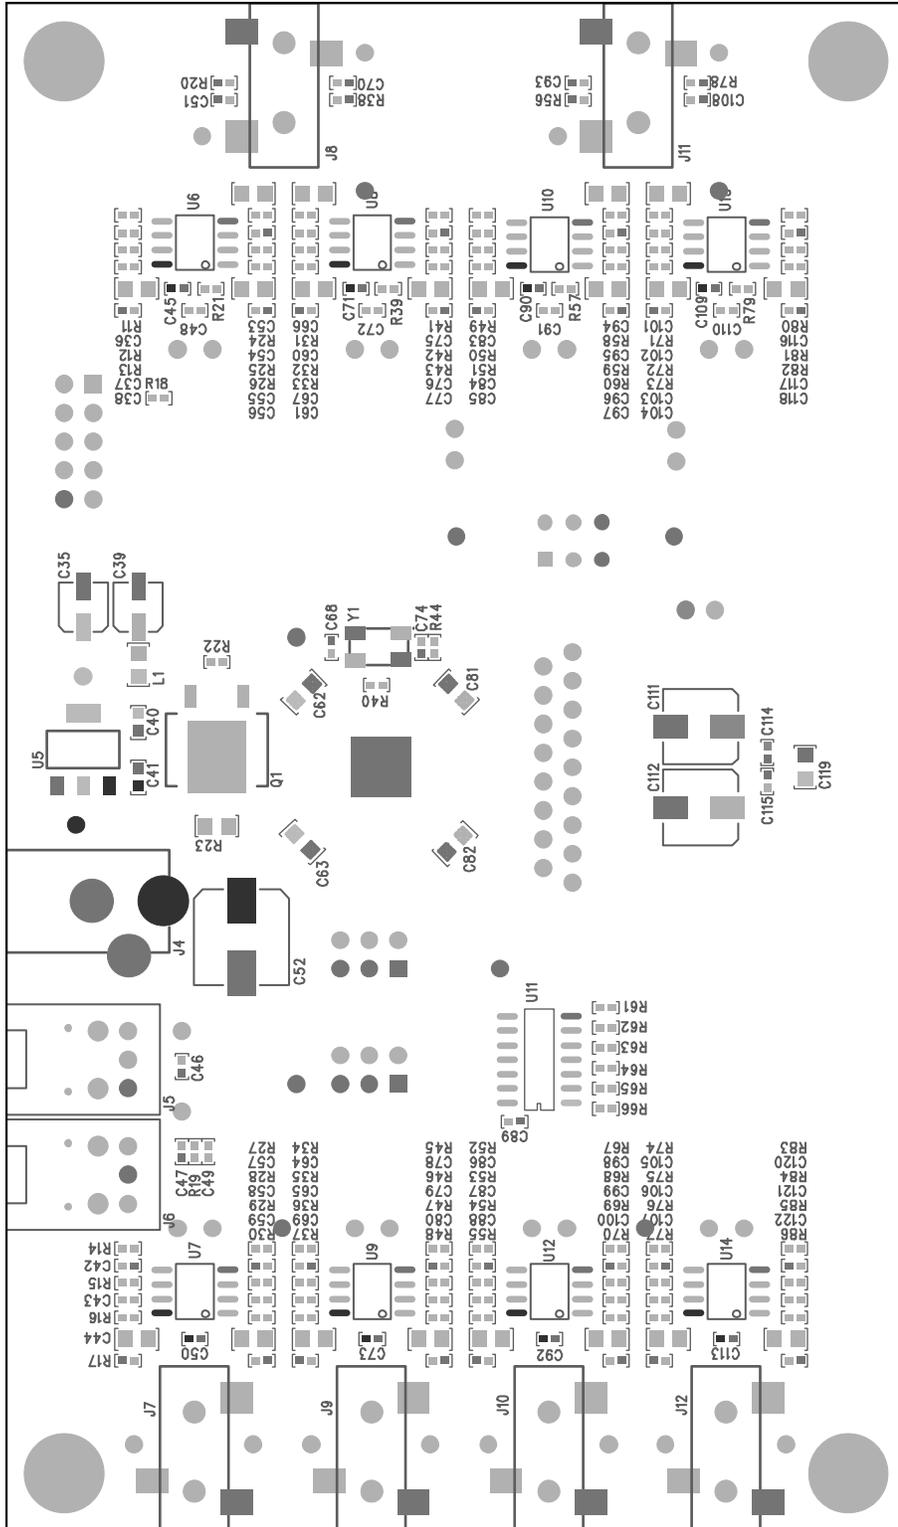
EVAL-ADAU1452MINIZ Layout, Bottom Assembly (Viewed from Below)
